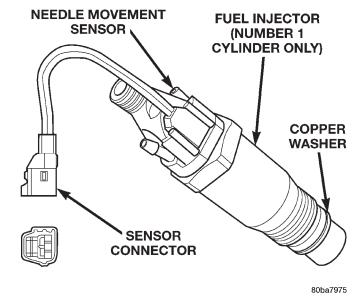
Fuel Injector Sensor — #1 Cylinder REMOVAL
